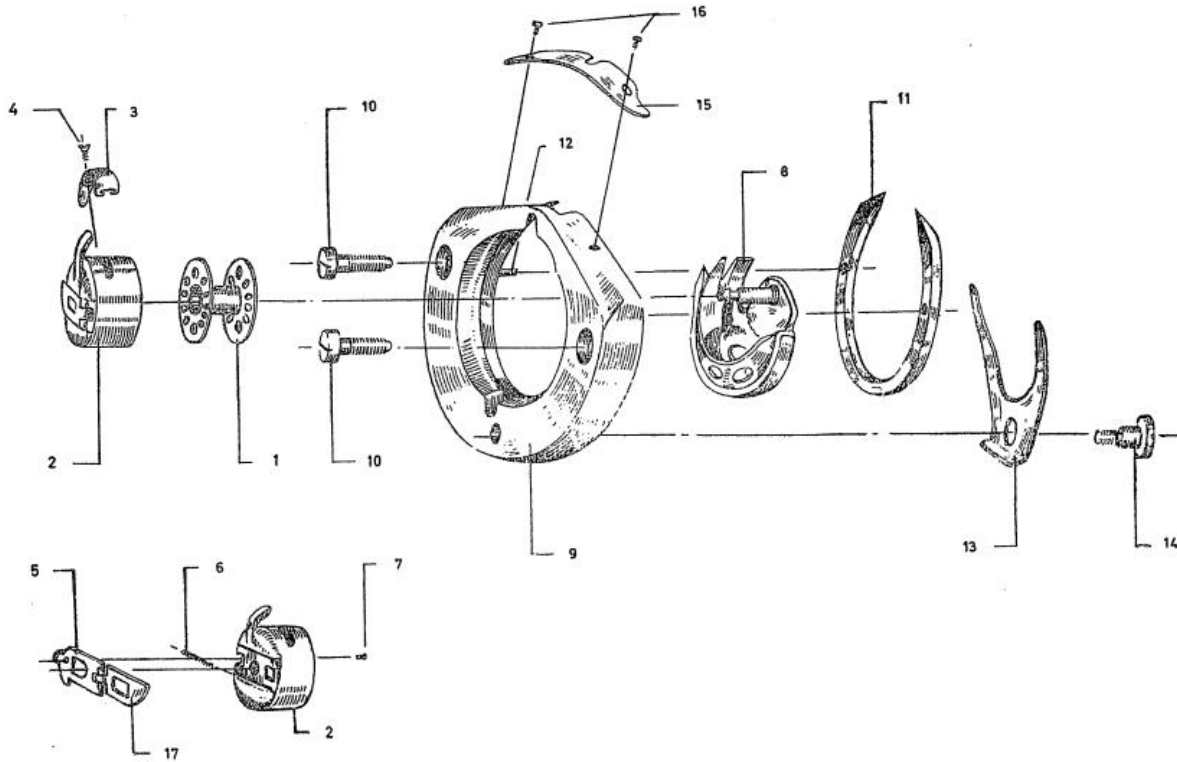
SHUTTLE RACE AND BOBBIN CASE ASSEMBLY
